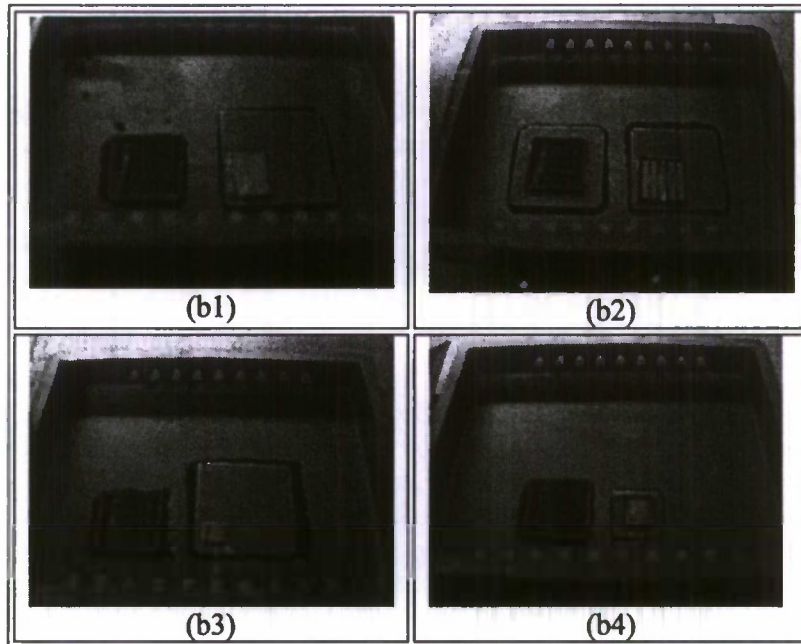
Integrated packaging scheme showing the bond wires, interconnects, die attach material.
